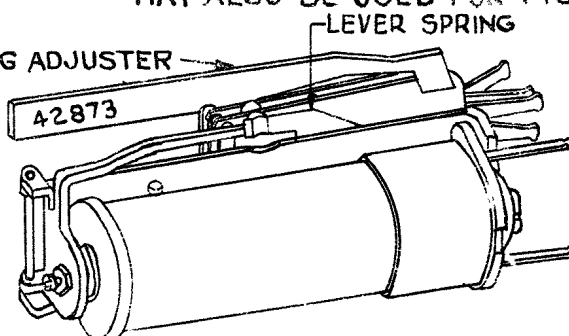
ADJUSTING LEVER SPRINGS FOR TENSION
